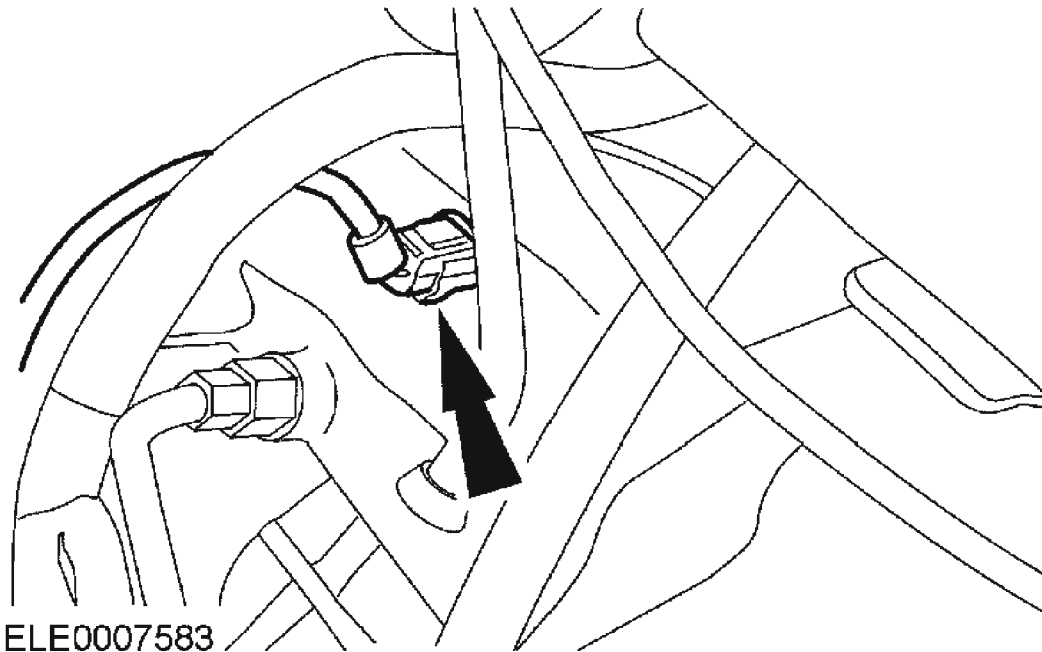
Disconnecting Turbine Shaft Speed (TSS) Sensor Electrical Connector
